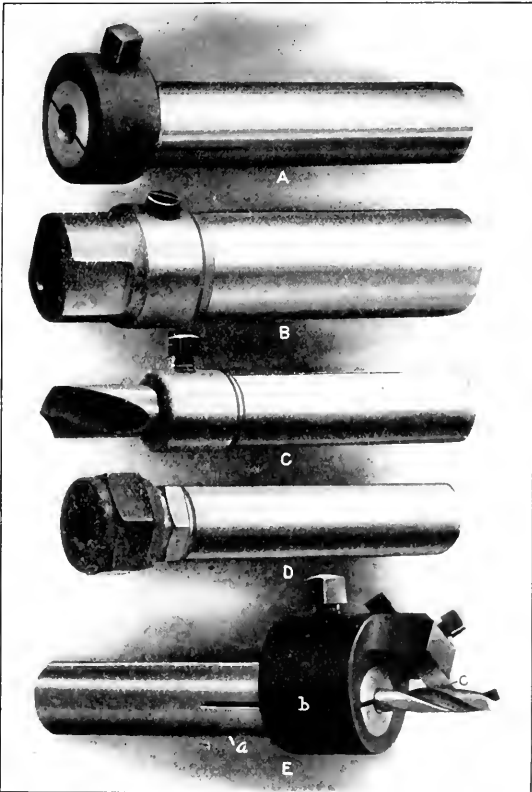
Standard Drill, Reamer and Centering Tool-holders
